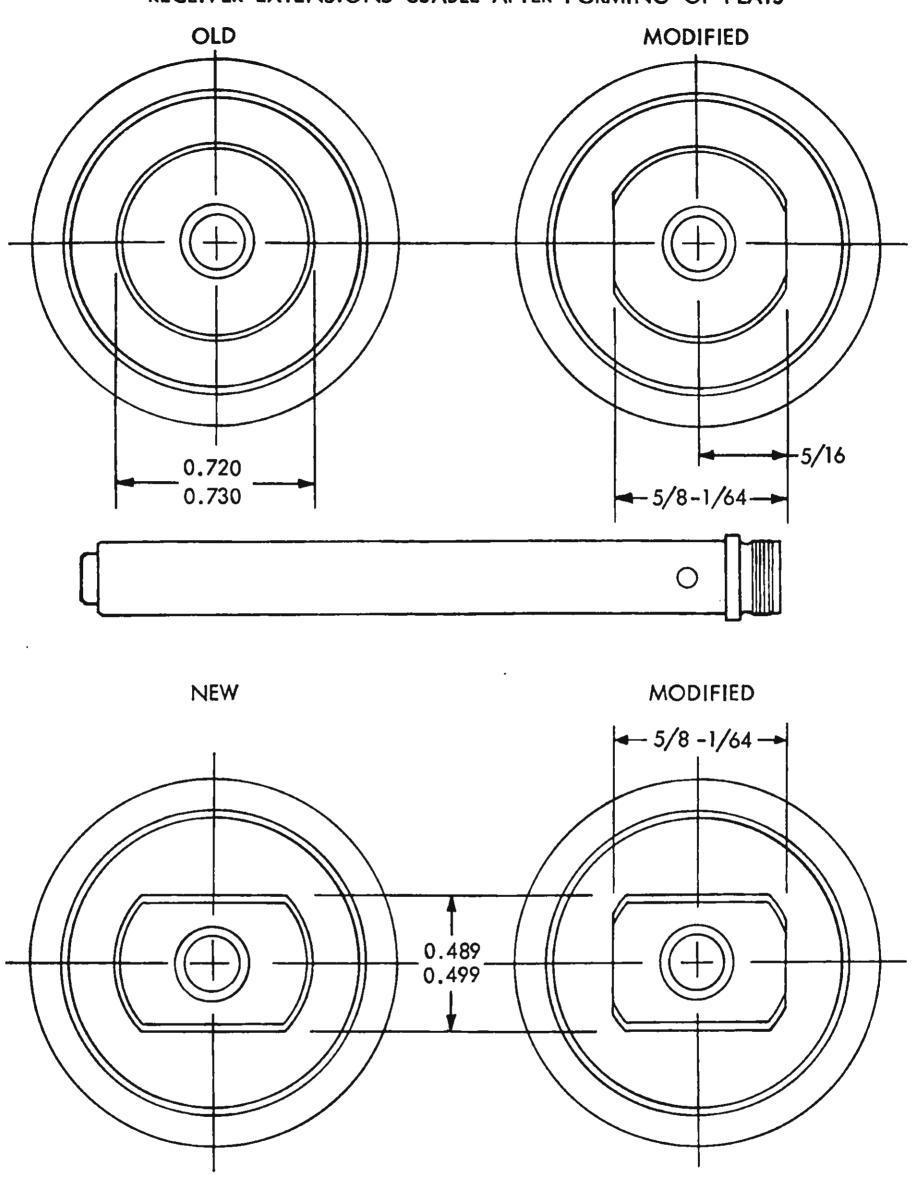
Disassembly/assembly of lower receiver group. (5 of 5)
